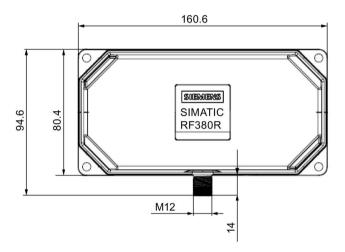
Dimension drawing SIMATIC RF380R - 2nd generation
